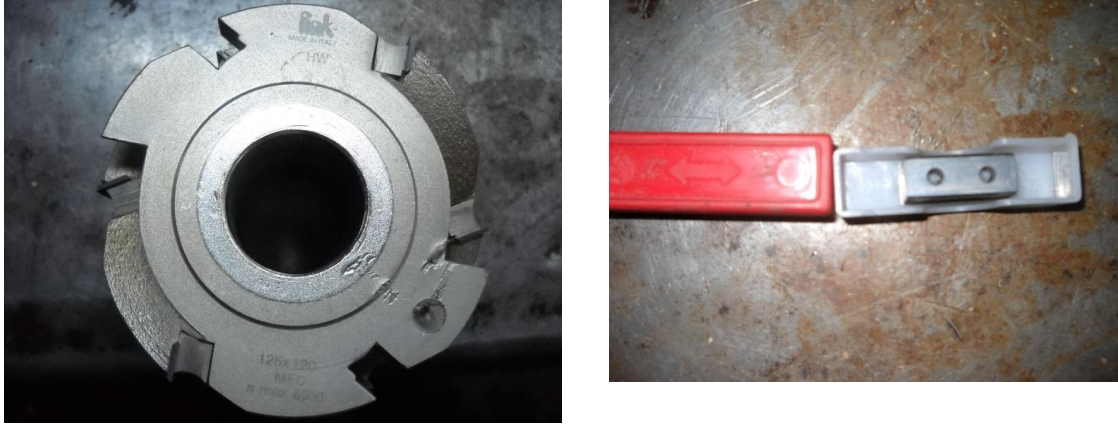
Milling cutter head used within the experiment (manufactured by LEITZ Brasov, Romania)
